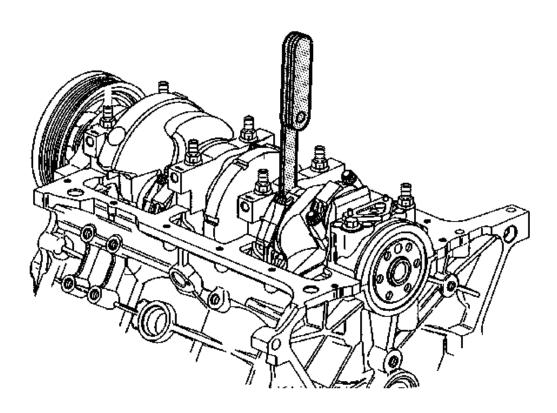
Measuring Crankshaft End Play Courtesy of GENERAL MOTORS CORP.
